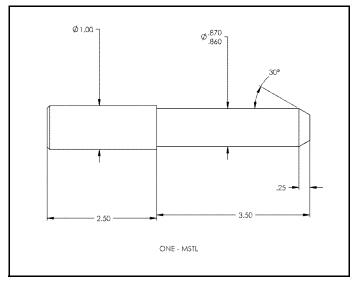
Drift Pin for Lining Up Thrust Washers with Output Planet Gear
